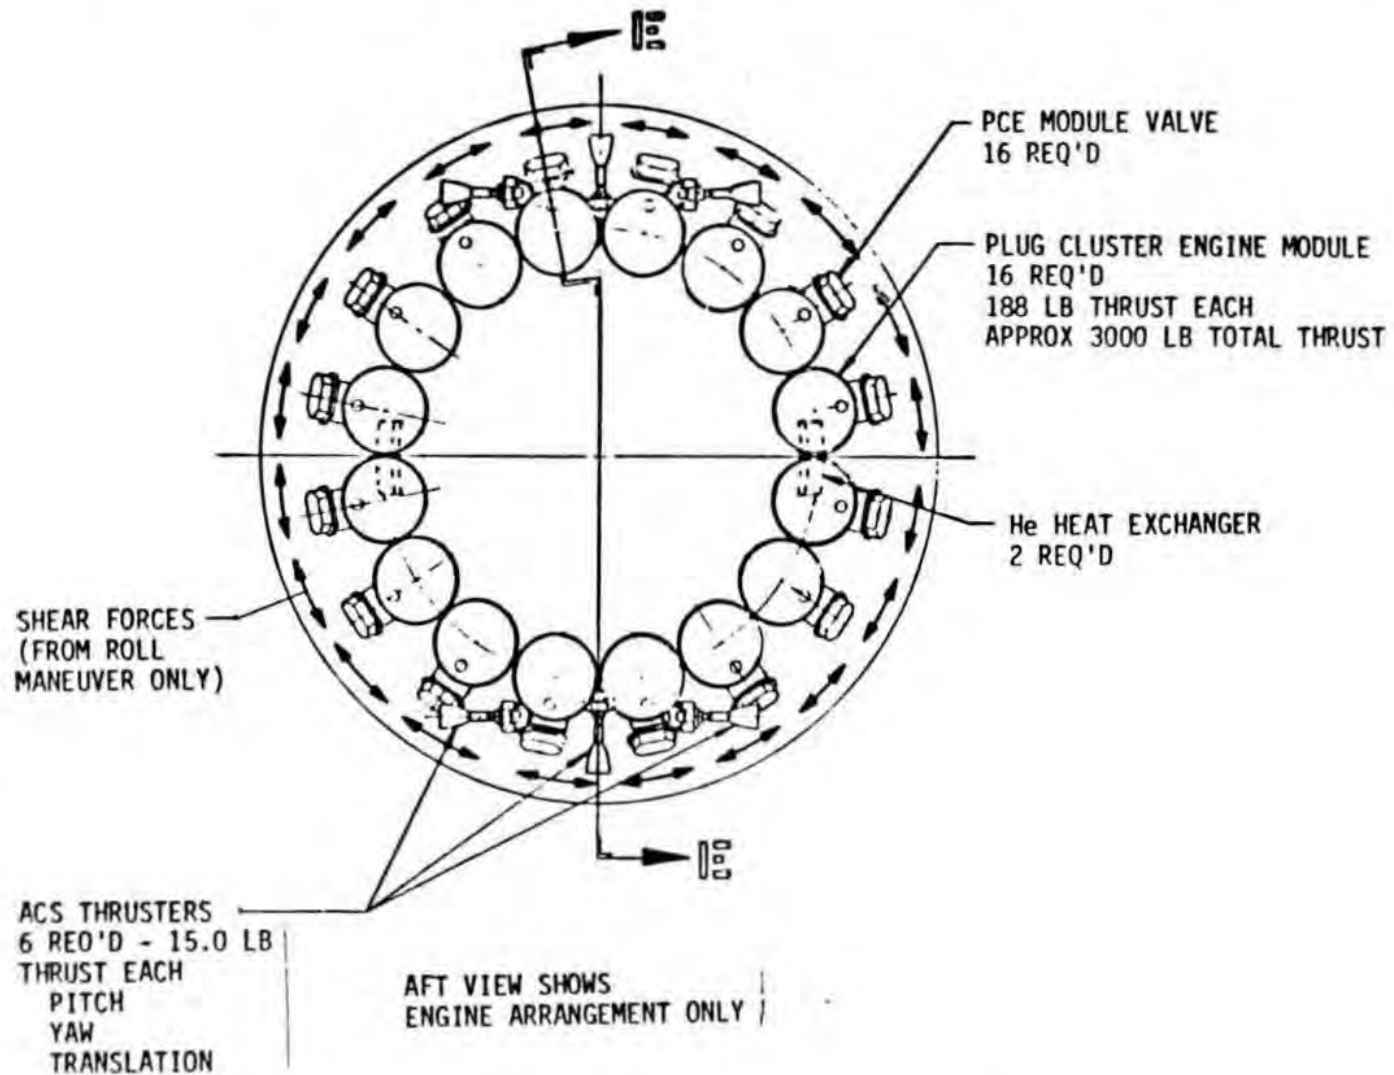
Aft Plug Cluster Engine/RCS Thrust Load Path Definition (Rear View)
